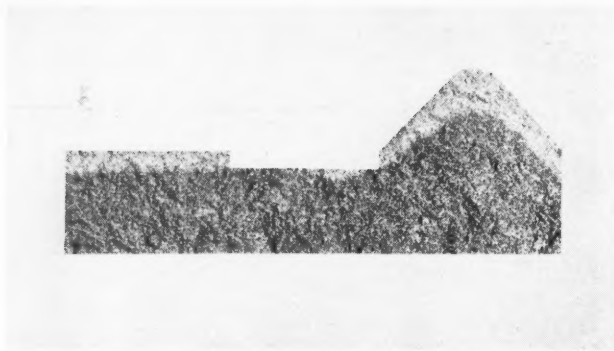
Unretouched photograph of a section through a lathe bed, showing the hardness pattern that is achieved by flame-hardening
